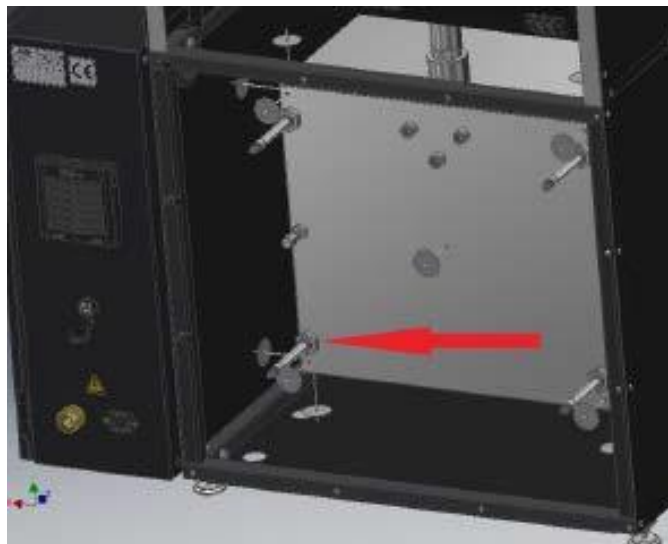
Heating element 1" retaining nuts (4), shown with insulation removed.
